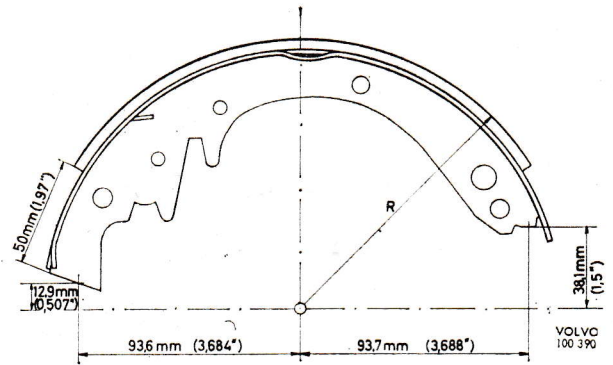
Adjusting measurement for rear brake shoes on rear wheels.
